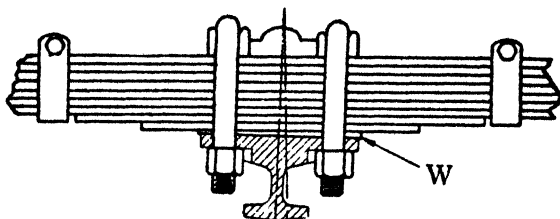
CASTER PRODUCED BY INSERTING WEDGE BETWEEN SPRING AND SEAT.
